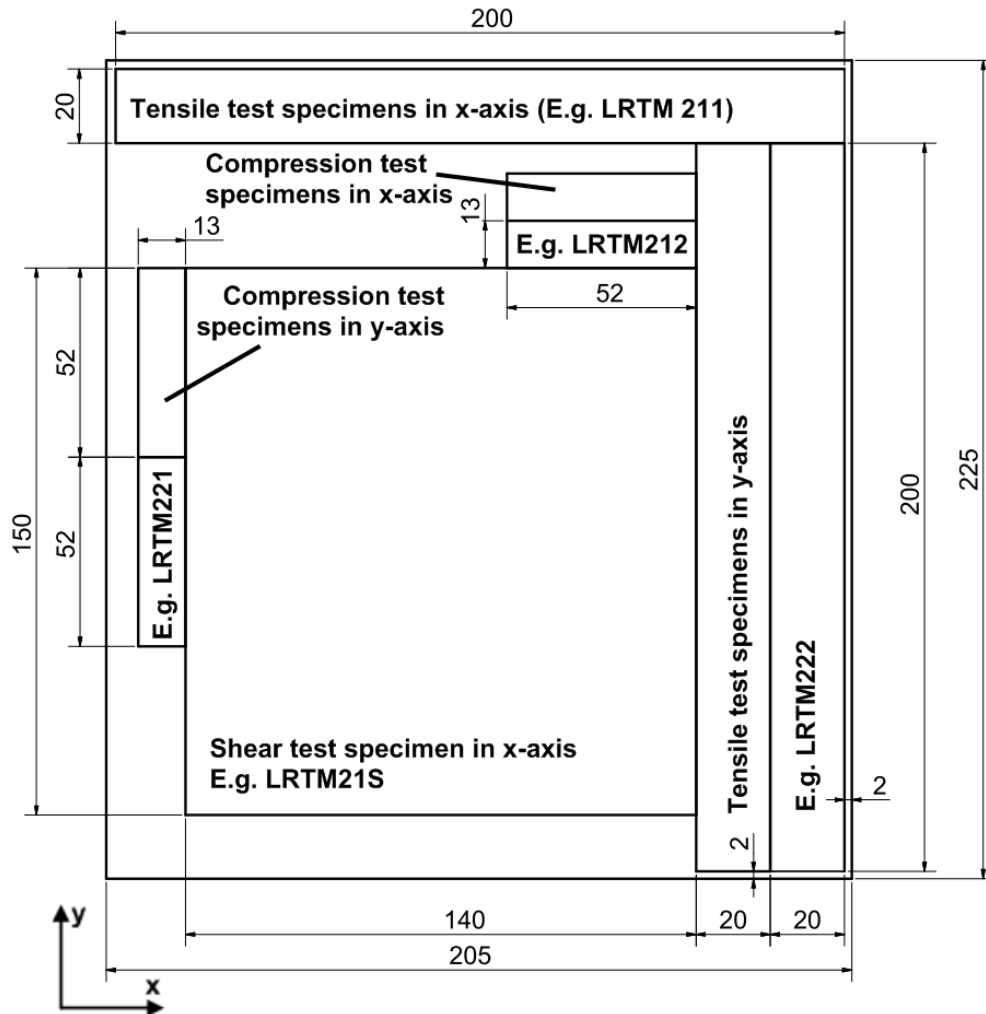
Geometry of Specimens Cut from L-RTM Plates
